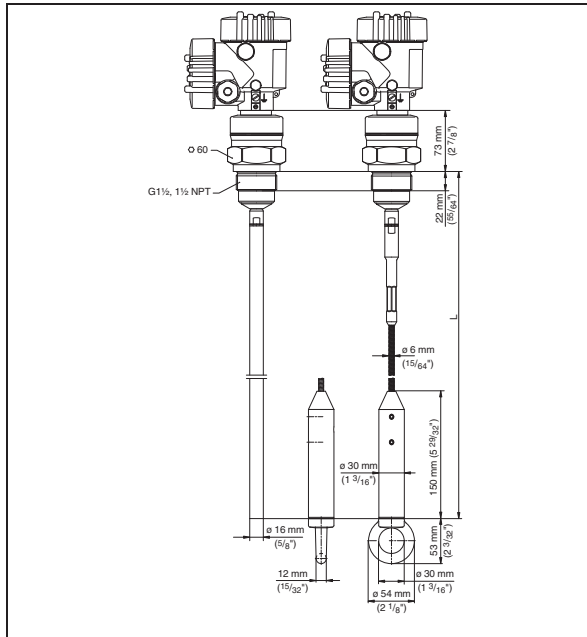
VEGAFLEX 62 - cable and rod version with thread (double chamber housing)
